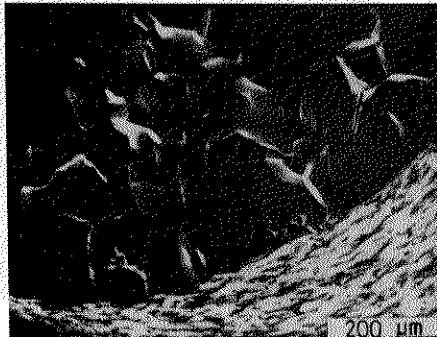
Fatigue fracture surface of shot peened specimens.
